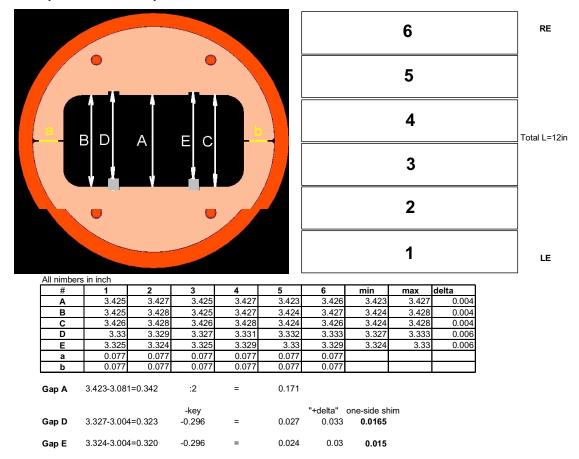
Cavity size measurements after cylinder-yoke pre-assembly.
